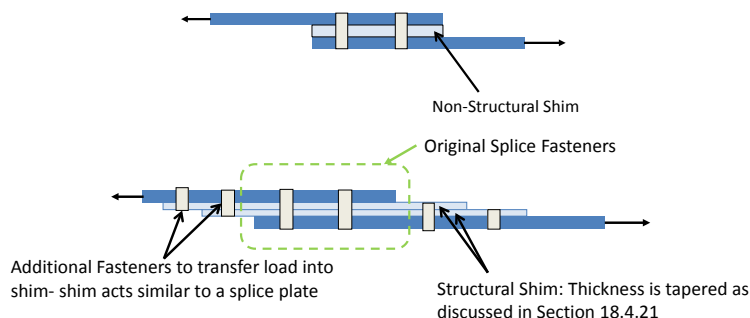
Example of Non-Structural and Structural Shims
